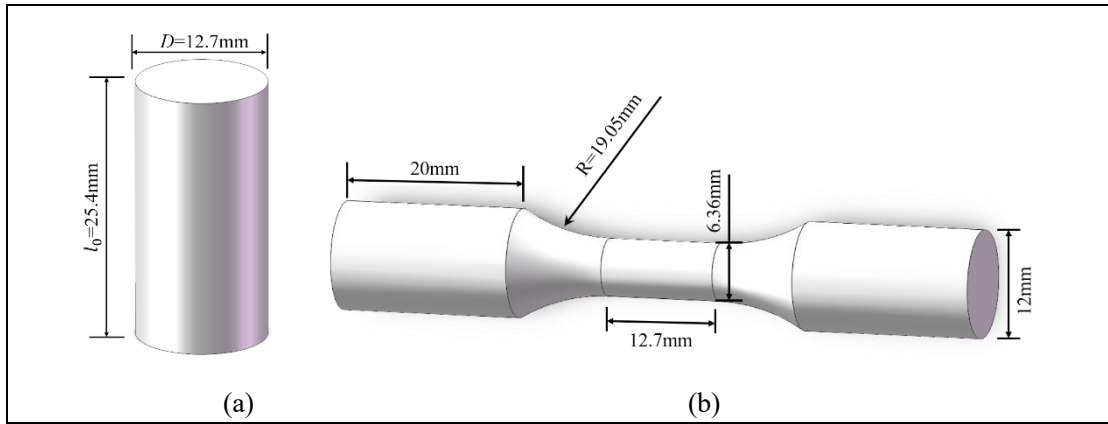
The dimensions of compressive specimen (a) and tensile specimen (b).
